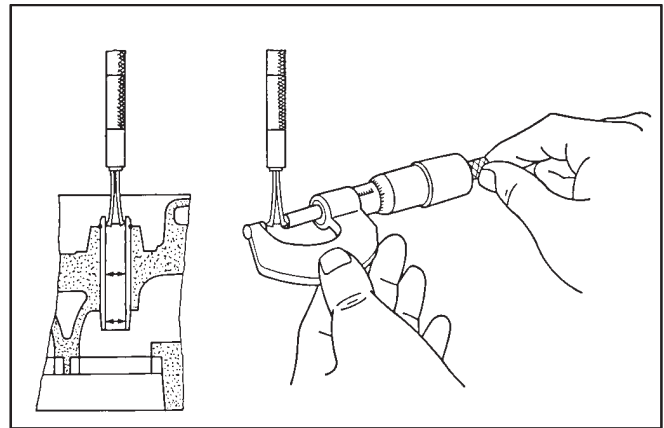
MEASURING VALVE GUIDE BORE
